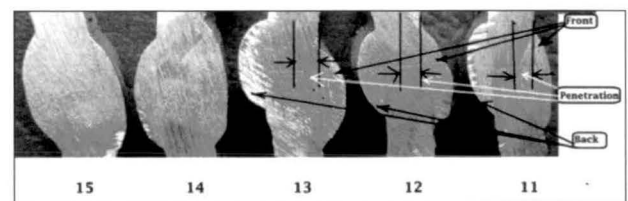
Penetration of weld-bead at welding speed 110 mm/min.
